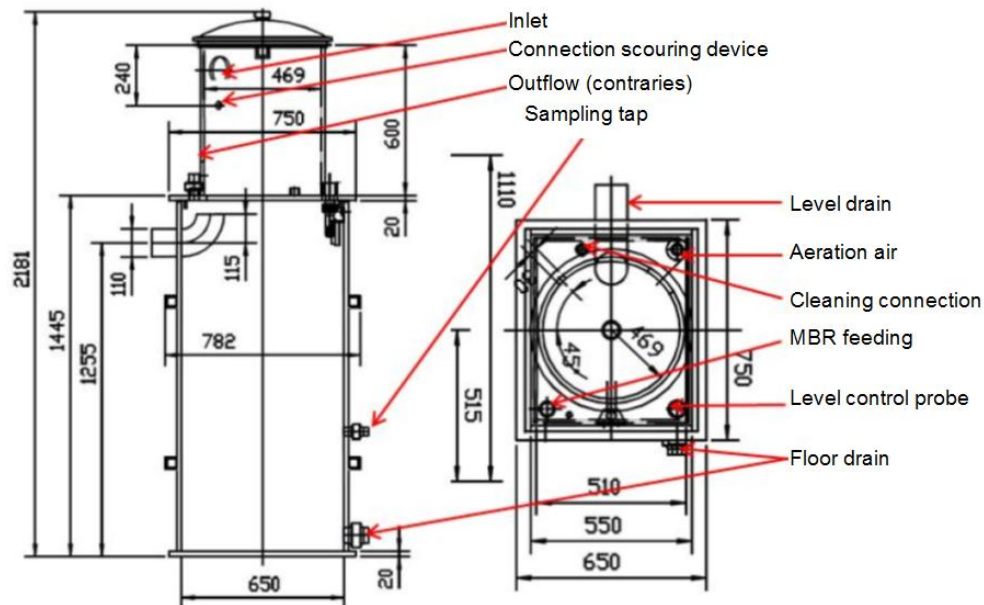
Technical drawing of intermediate storage tank; (HUBER SE, 2011a)
